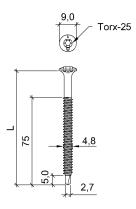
BSRF 4.8 Screw forfixing in metal sheets
